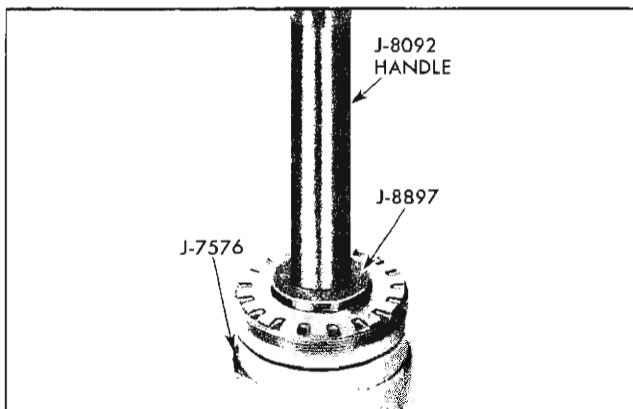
Tool Positioned to Remove Front Pinion Bearing Outer Race (Synchro-mesh)
